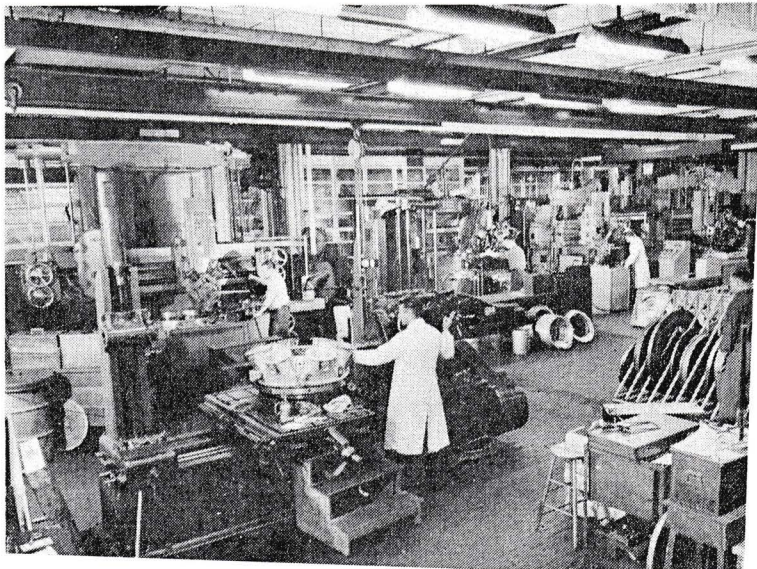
In foreground, diffuser casting in horizontal boring machine.
